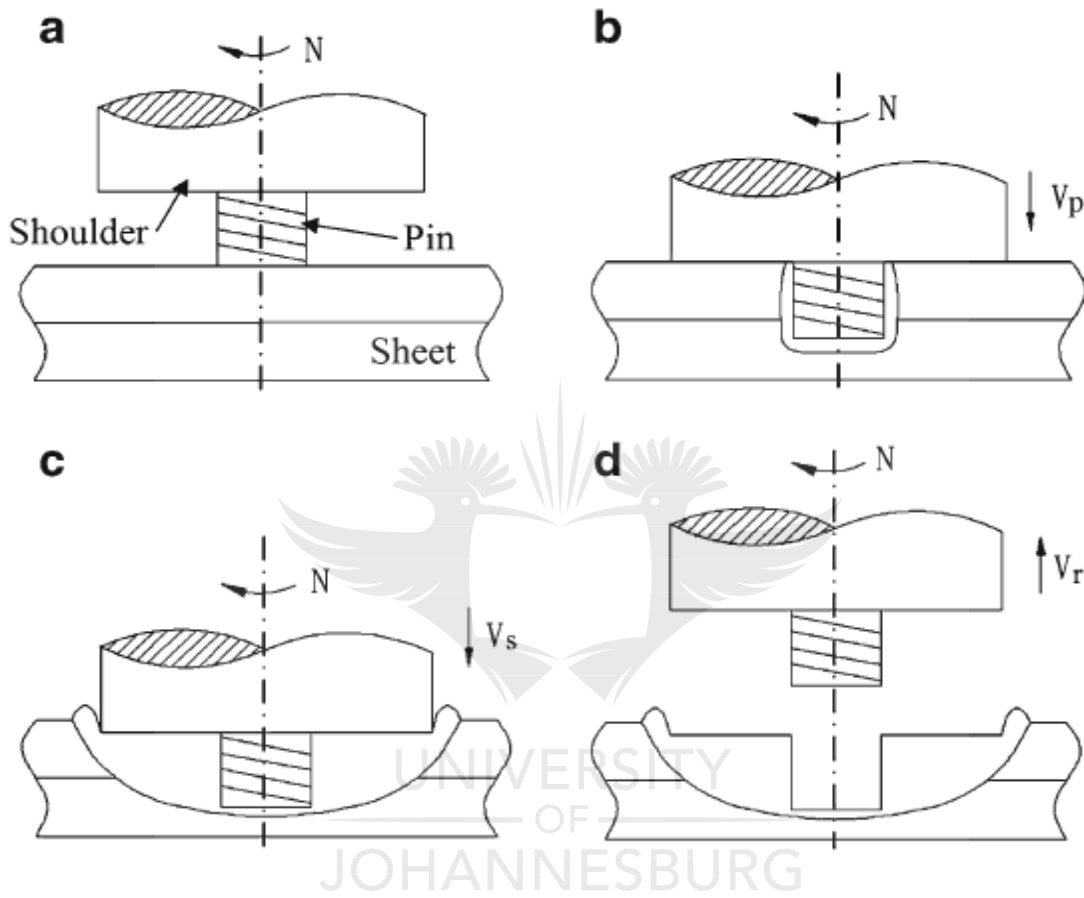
Illustration of friction stir spot welding process: (a) the pin comes in contact with the surface of the upper work piece; (b) the pin stirs in the workpieces; (c) the shoulder participates in the welding; (d) and finally, the tool is drawn out [4].
